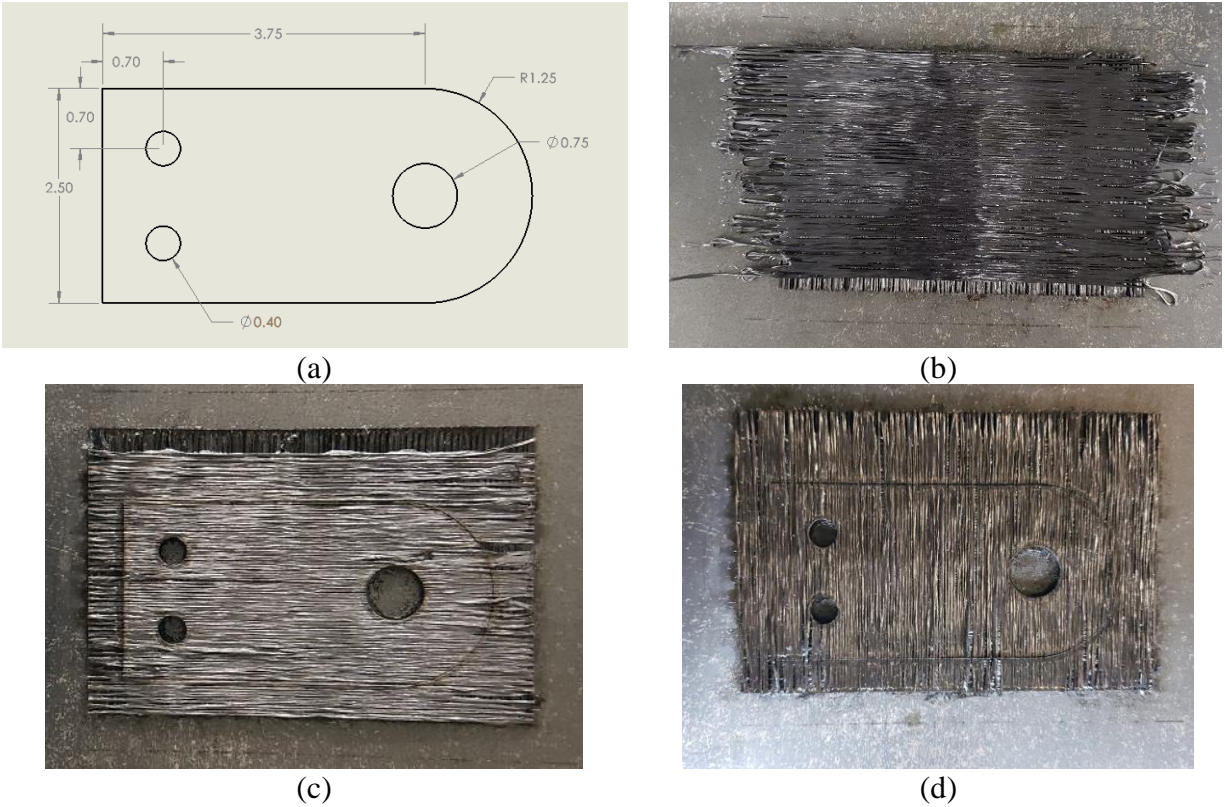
Manufacturing process of custom object using 3D printing incorporated with CO₂ Laser cutter (a) CAD model of the object, (b) 3D printed fiber layup before laser cut (c) 0° fiber lay-up after laser cut (d) 90° fiber lay-up after laser cut.
